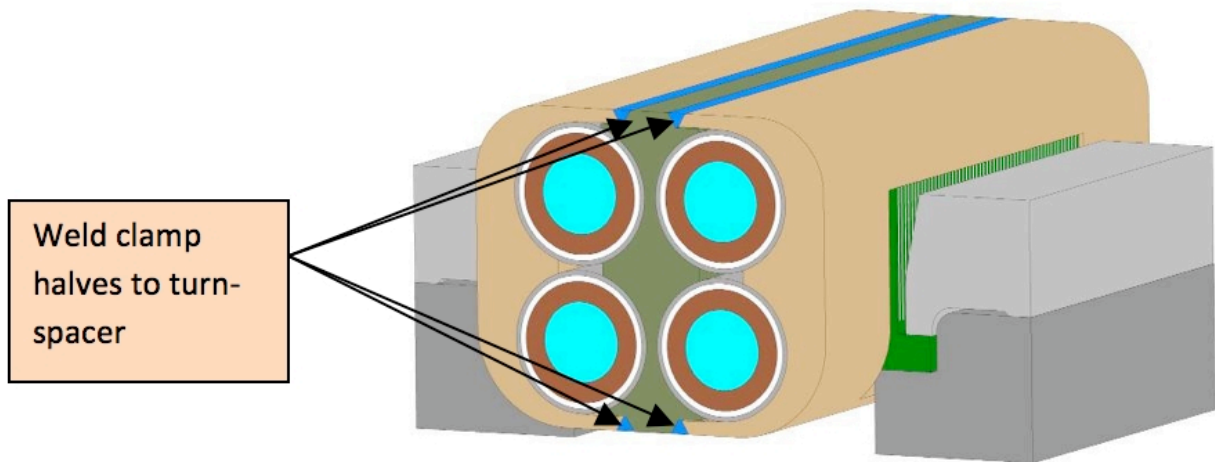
Weld Clamp Halves to Center Turn Spacer
